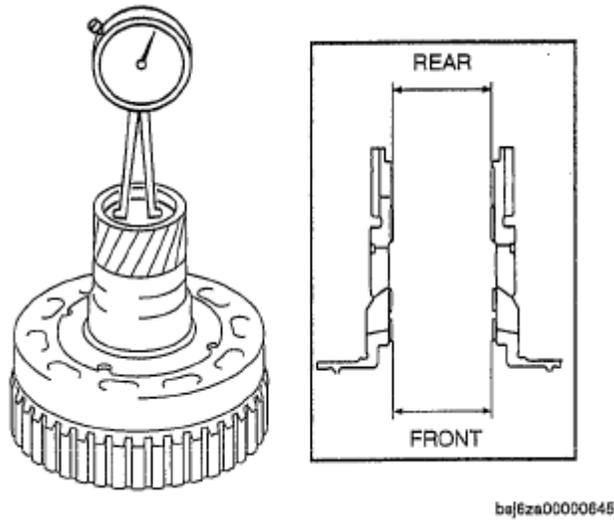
Measuring Inner Diameter Of Clutch Hub Component Bushings Using Dial Gauge
